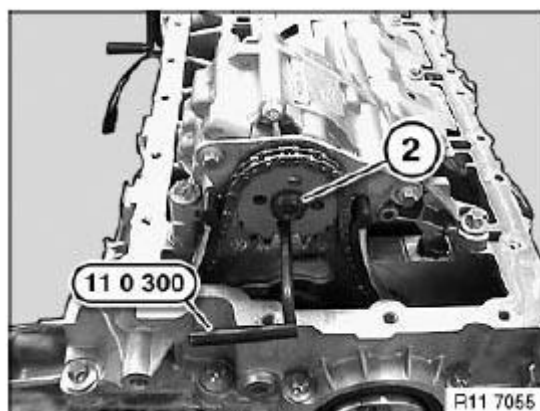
Identifying Central Bolt With Special Tool (11 0 300)
